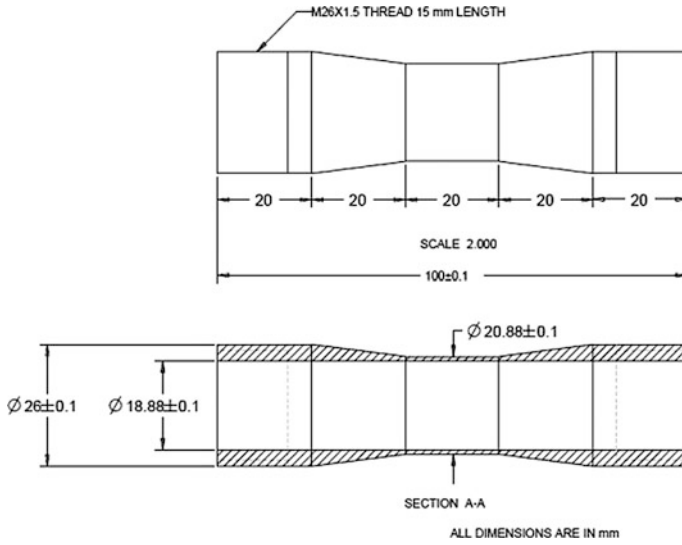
Manufacturing drawing of fatigue specimen pipe
